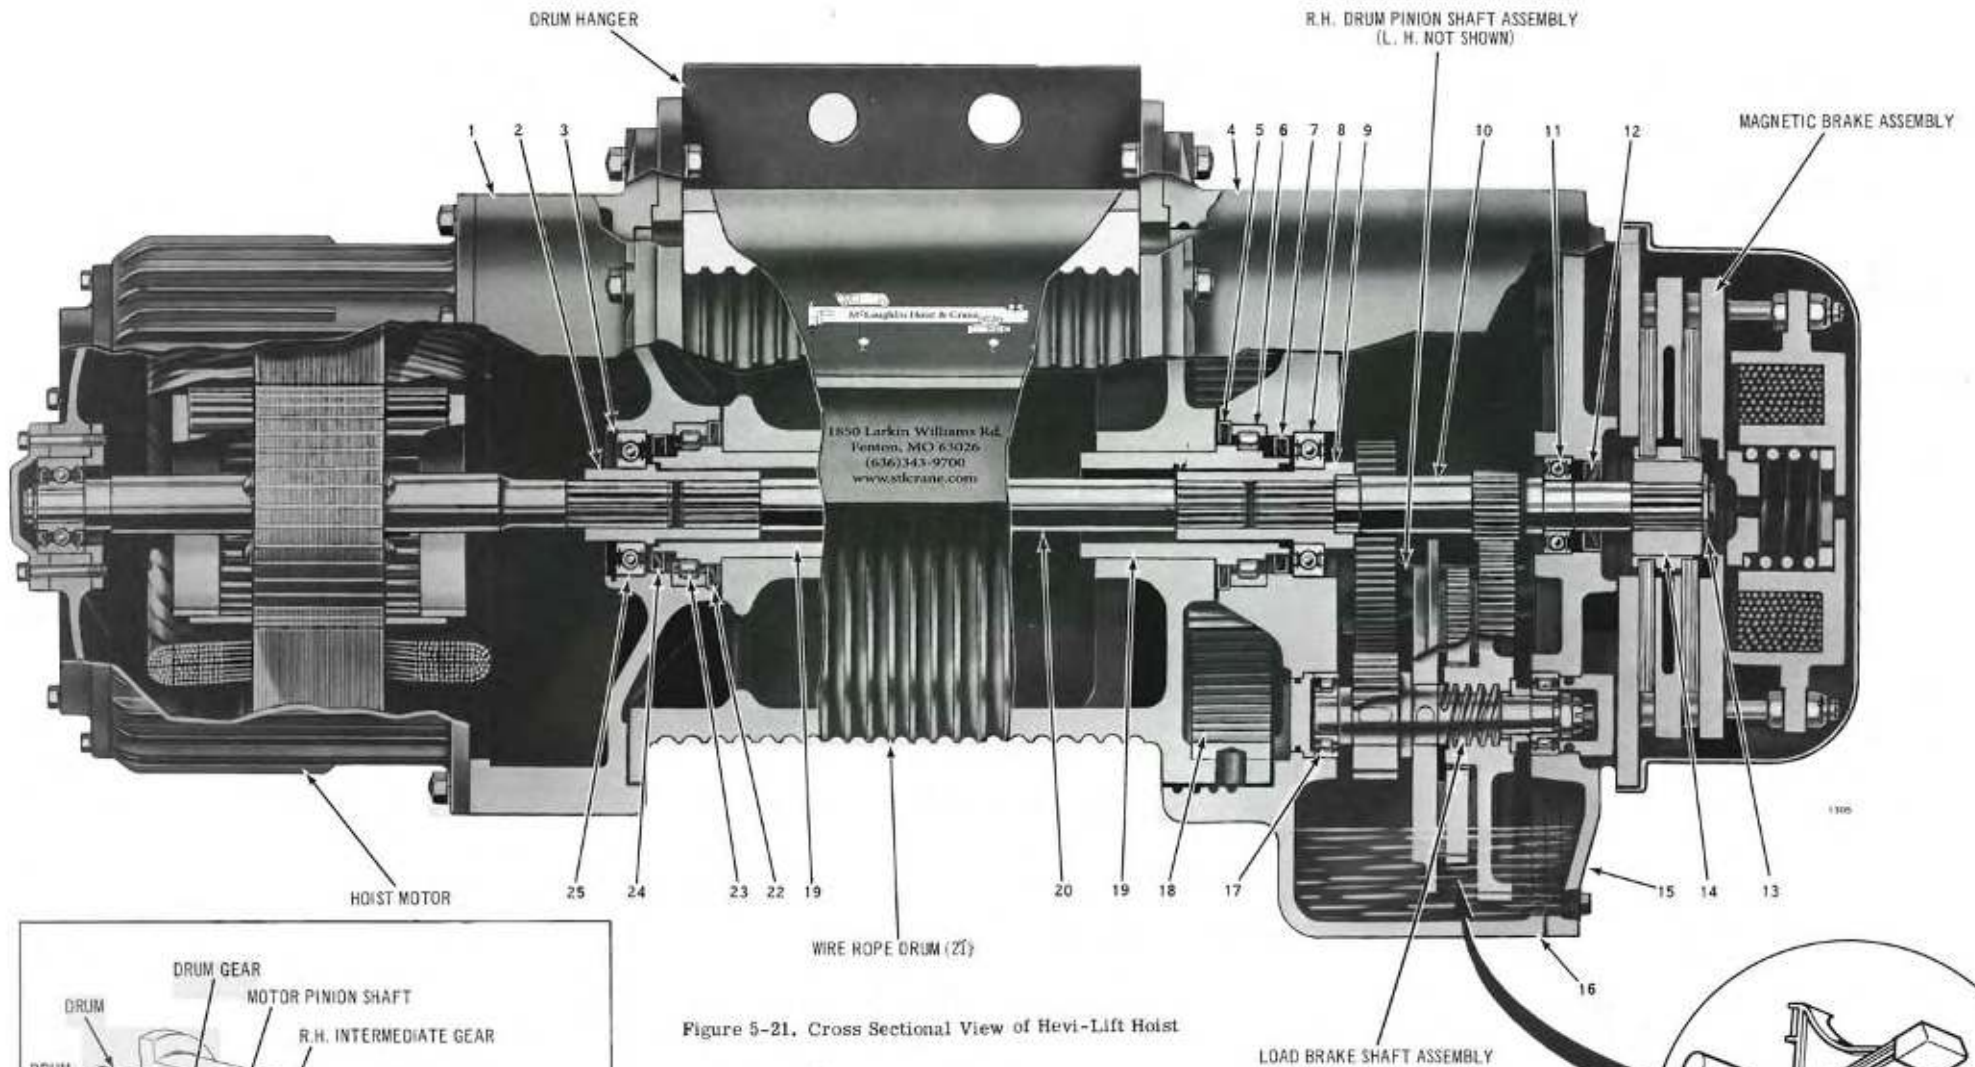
Cross Sectional View of Hevi-Lift Hoist
